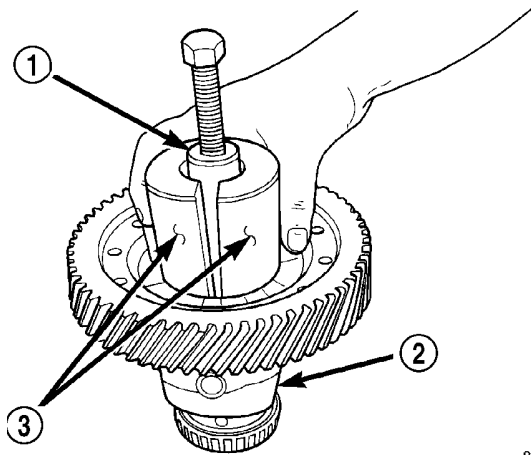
Position Button and Collets Onto Differential and Bearing (Ring Gear Side)
